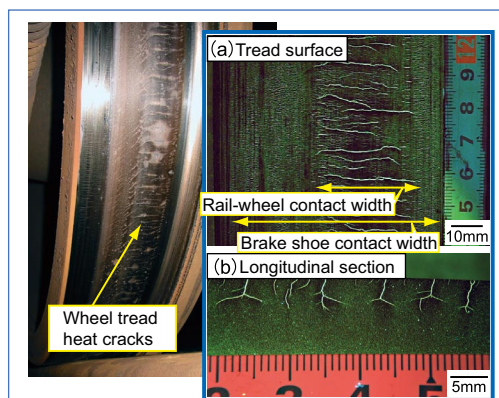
Heat cracks on an actual tread (left) and those reproduced on a tester-mounted tread (right)
